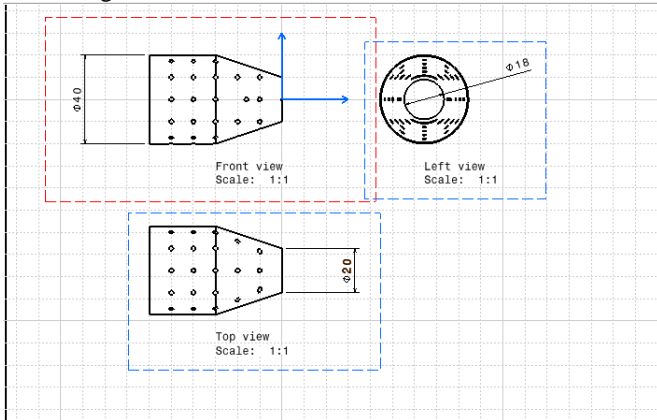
3-D View of Flame Holder Design with Dimensions.
